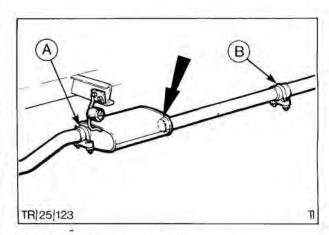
Front muffler section of OHC variants. A - Join between front down pipe and front muffler B - Join between front and rear muffler section NOTE: Suitable cutting point arrowed
